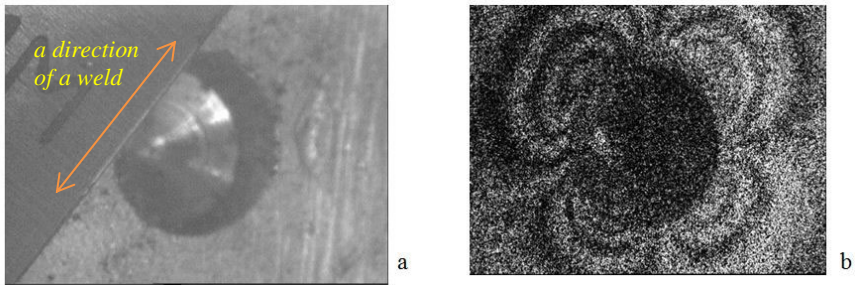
Appearance of a biaxial stress state on a weld axis: a - the drilled hole on an axis of a weld and a ruler marked a direction of a weld, b - the interferogram of normal surfaces displacements in a neighbourhood of this hole
